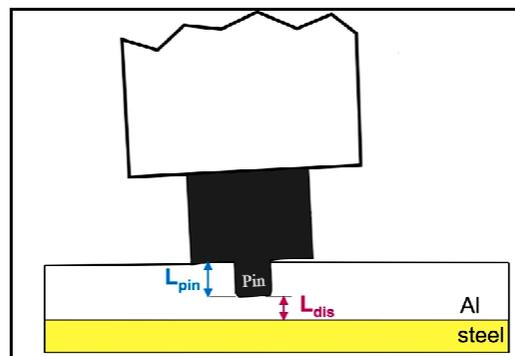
Schematic illustration of friction stir lap diffusion welding.
